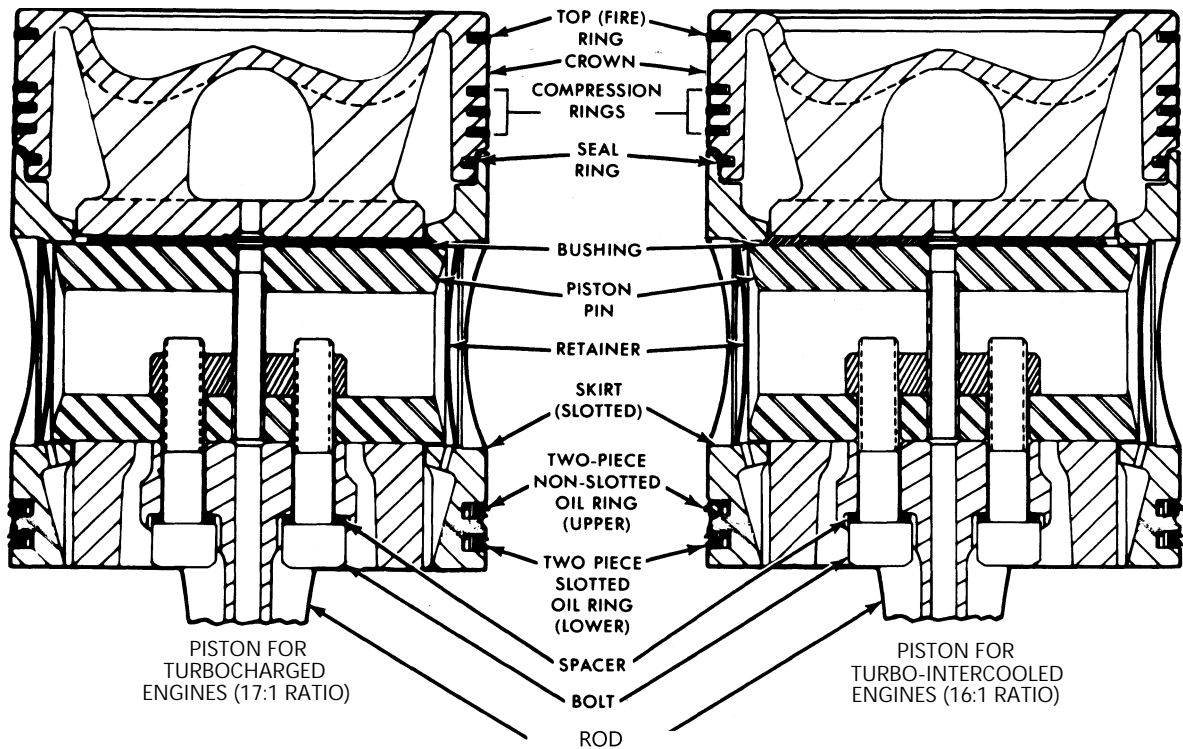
Piston Ring Arrangements (Turbocharged Engines)
